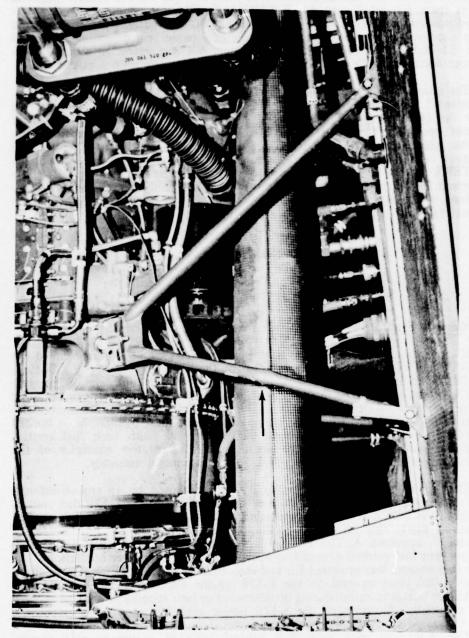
Photo I. Right Side Engine Deck, Deformed Engine Mount.
